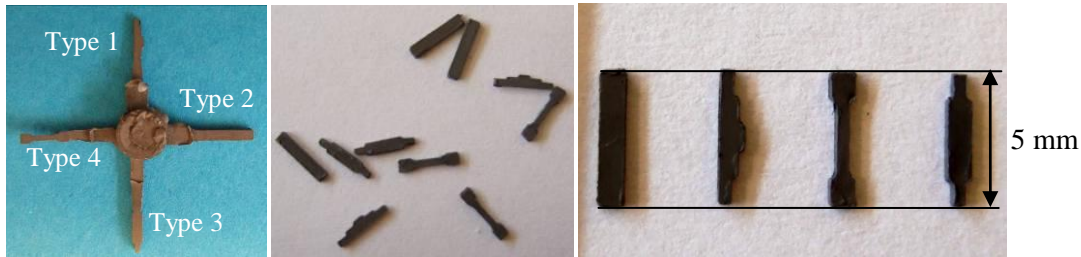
Geometry of the four different micro-mold cavities used specifically in micro-injection tests, a) Type 1, step test specimen; b) Type 2, beam-bending test specimen; c) Type 3, cross test specimen; d) Type 4, tensile test specimen
